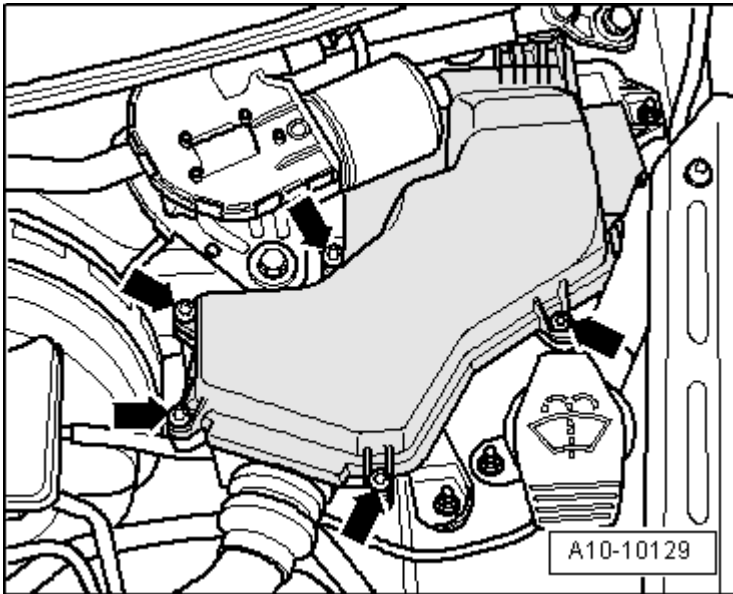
Removing Bolts And Cover Form E-Box At Left In Engine Compartment
